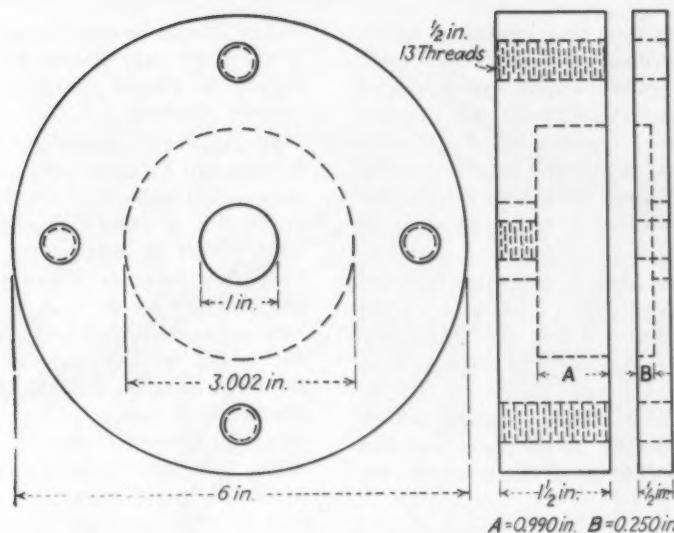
Holder for a 0.500 in. hexagon die of the center-bearing type. Dies up to 0.650 in. may be used with this holder.
